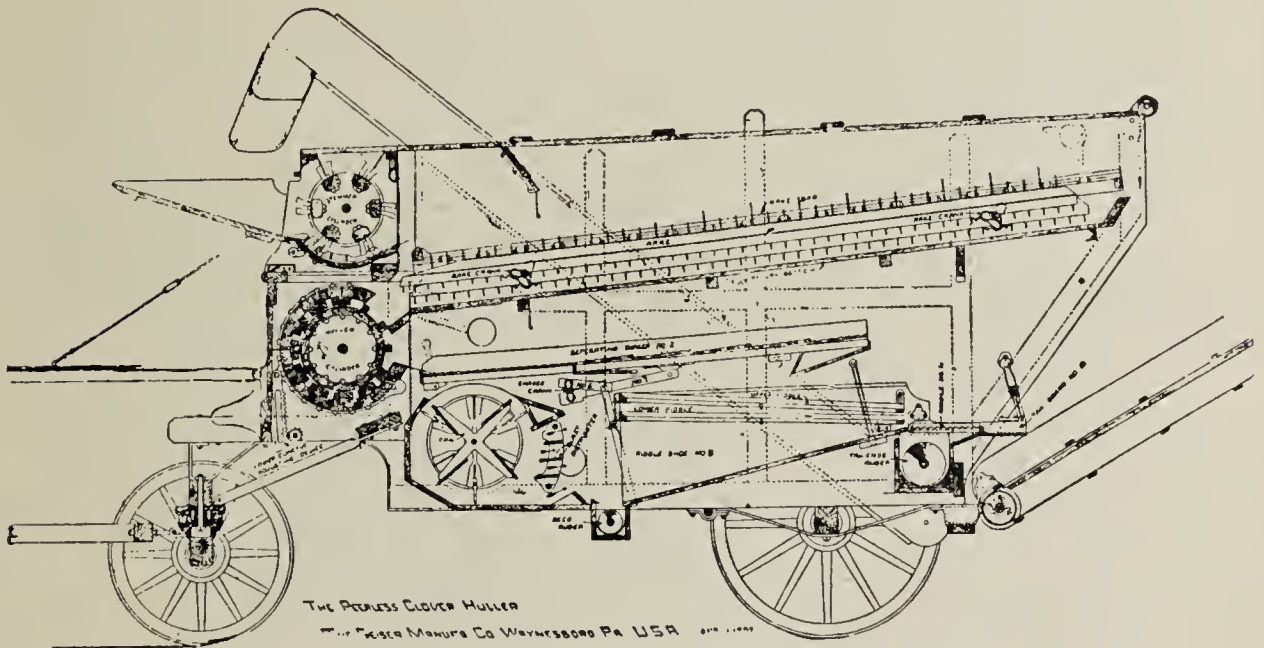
SECTIONAL VIEW OF GEISER CLOVER HULLER.
